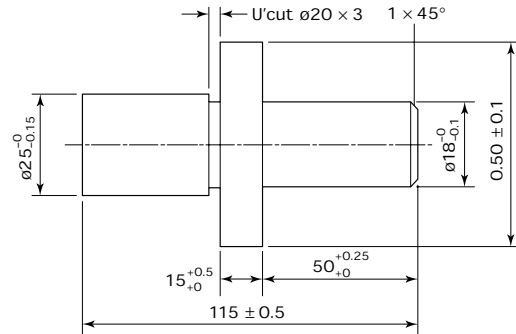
Shaft: material free-cutting mild steel $\text{Ø} 50 \times 125$ (dimensions in millimetres)
